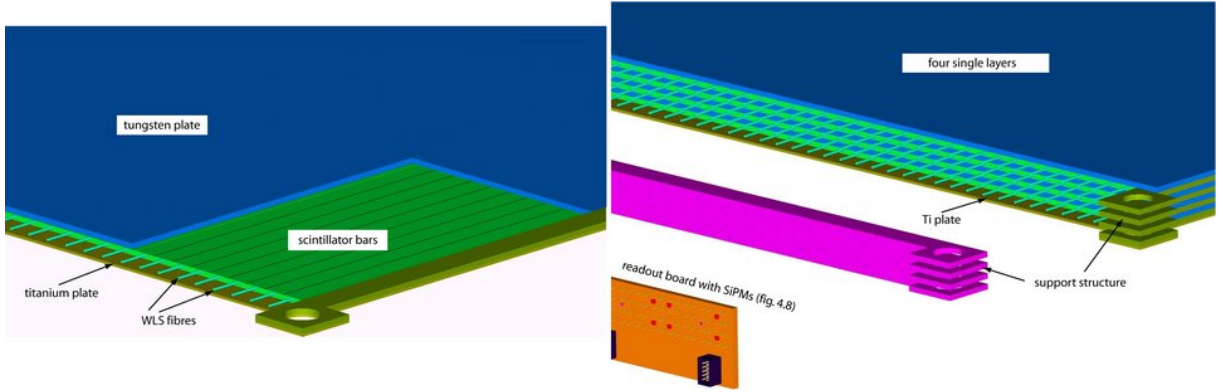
Exploded drawing of a single ECAL layer at the bottom of a superlayer (*left*) and one superlayer (*right*).
